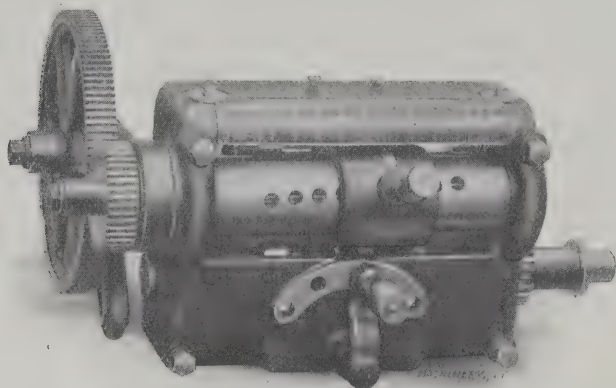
Gear Box, complete, ready to be Applied to Machine
